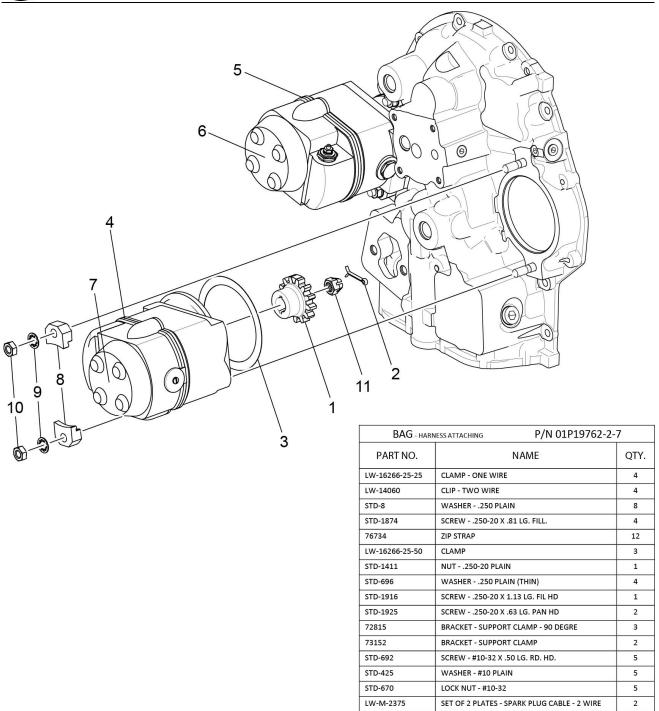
Magnetos, Magneto Drives, and Harnesses,
